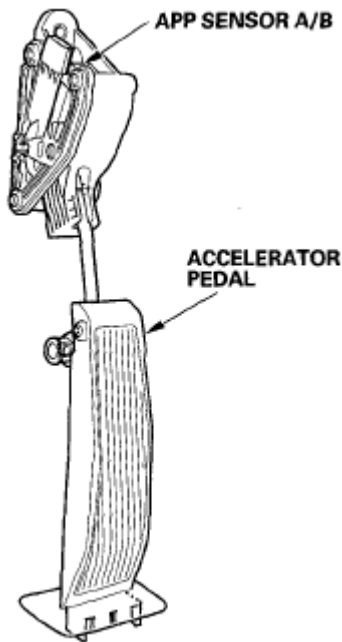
Identifying APP Sensor A/B And Accelerator Pedal
